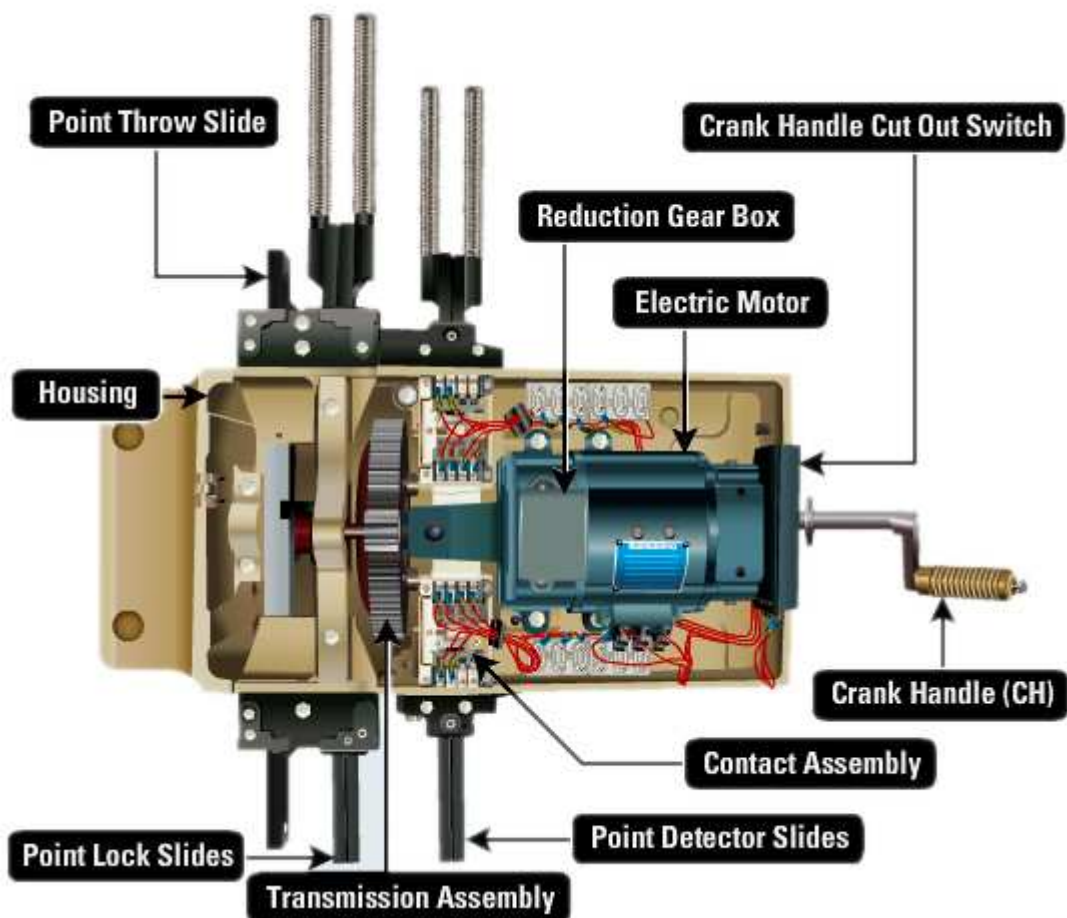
IRS POINT MACHINE ASSEMBLY
